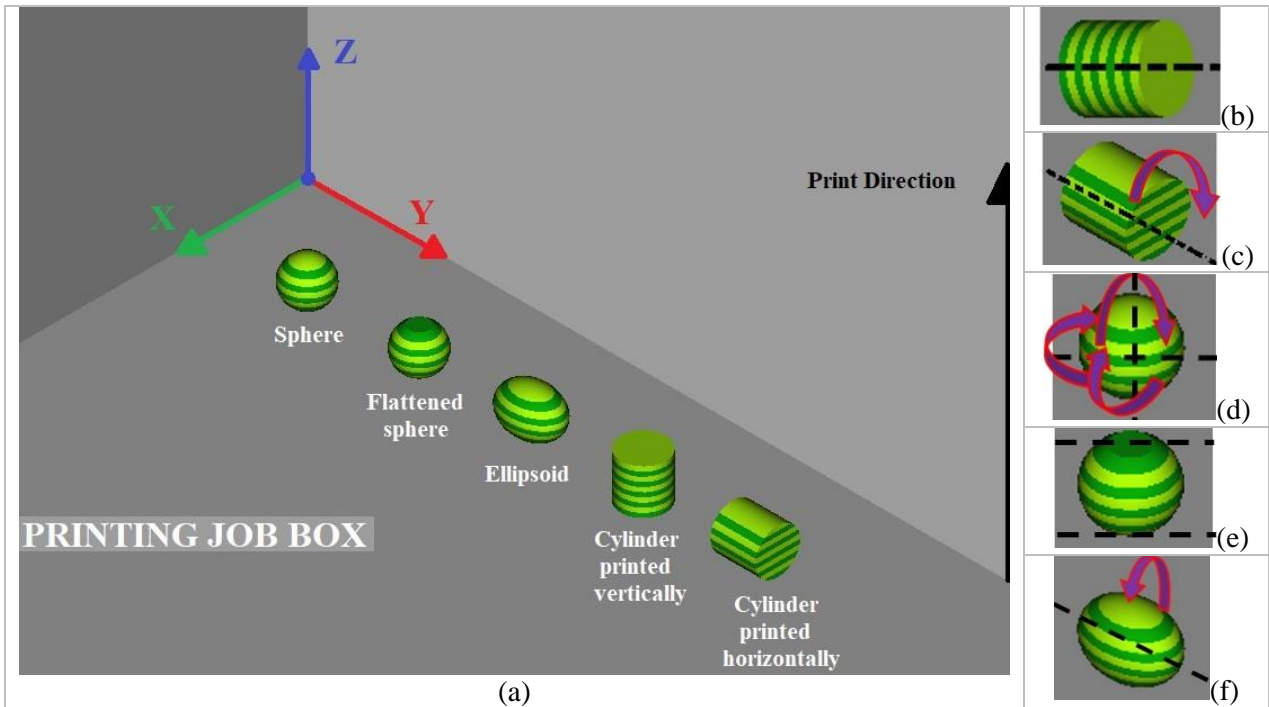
3DP specimens schematic illustration of shapes: a) when manufactured into the printing job box; and potential bedding orientation when specimen is impacted: b) cylinder printed vertically: 0° , c) cylinder printed horizontally: 0° – 90° , d) sphere: 0° – 180° , e) flattened sphere: 90° , and f) ellipsoid: 0° – 90° .
